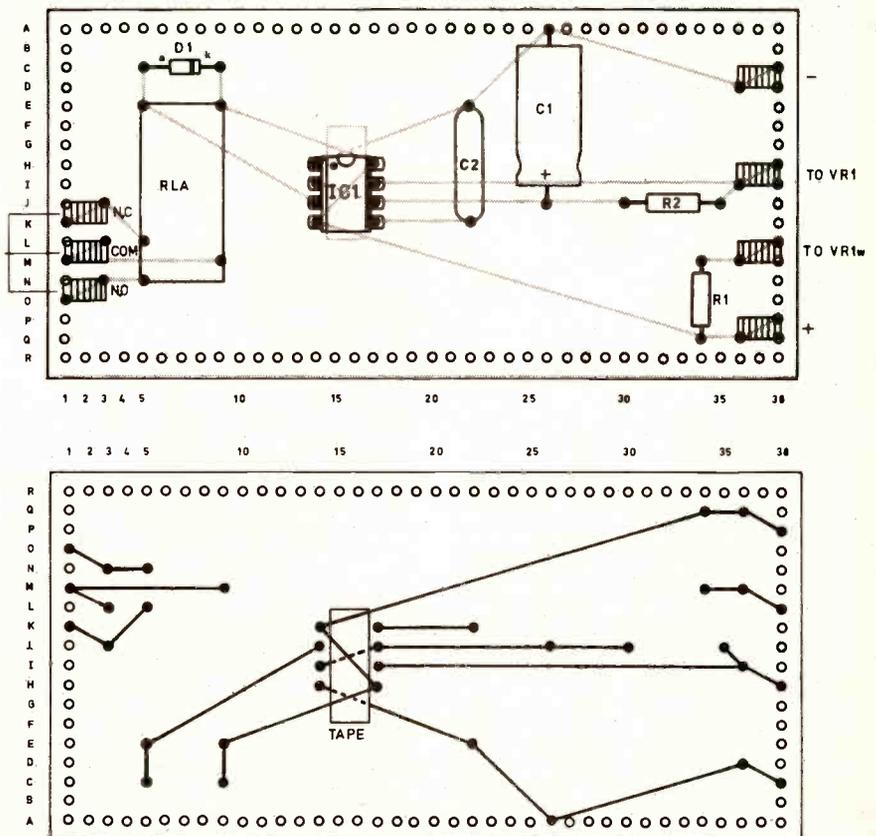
Easiwire board component layout and details of the underside wiring. Wires connecting the relay contacts should be rated at least 10A.
